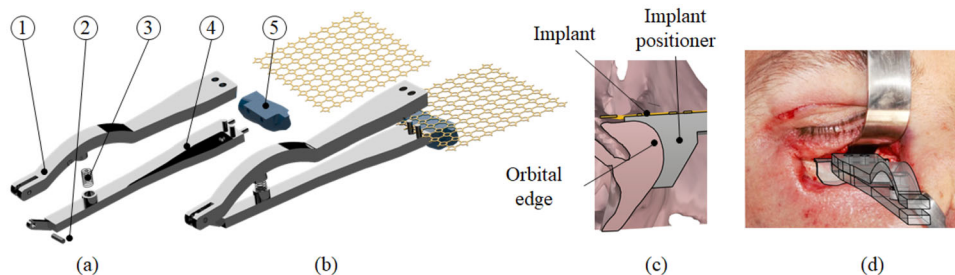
a Medical device exploded, b assembled, and c cross-section views; d simulation of the medical device for a transcutaneous approach (① upper handle; ② pin; ③ spring; ④ lower handle; ⑤ implant positioner)
